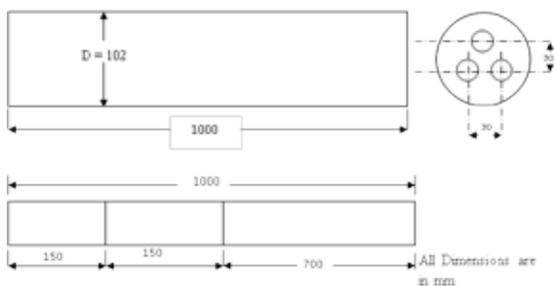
Schematic of the shell and heat pipe and arrangements of tubes.
